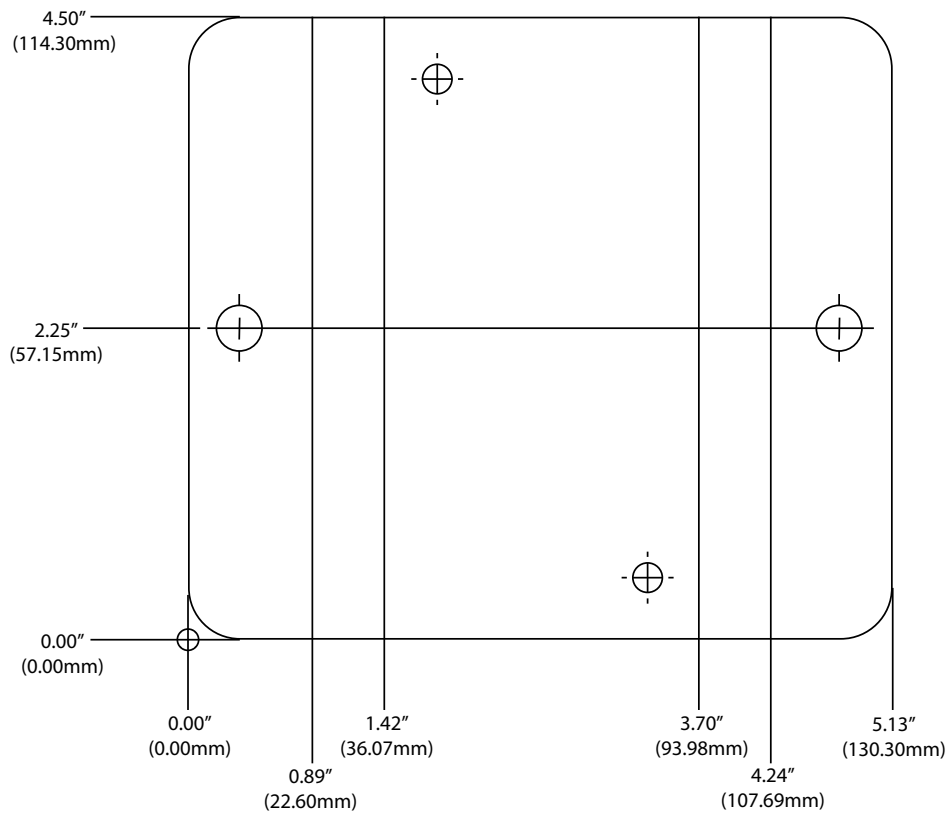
IRIM Bracket Bolt Pattern Dimensioned Top View
